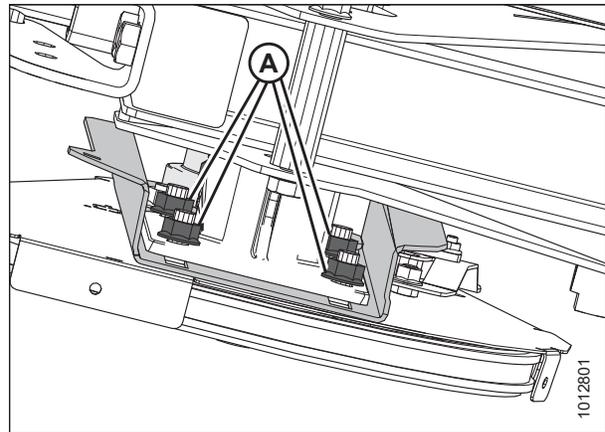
Single-Reel Drive – Viewed from Underside of Reel
